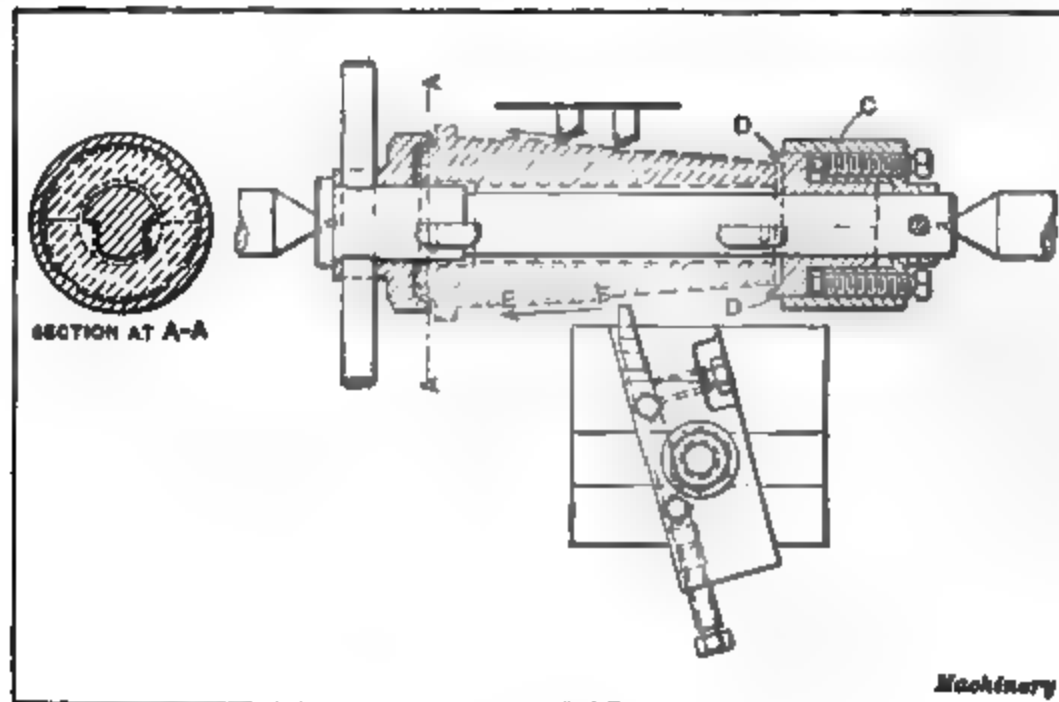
Arbor for holding Tapered Bushings with Rough Ends
